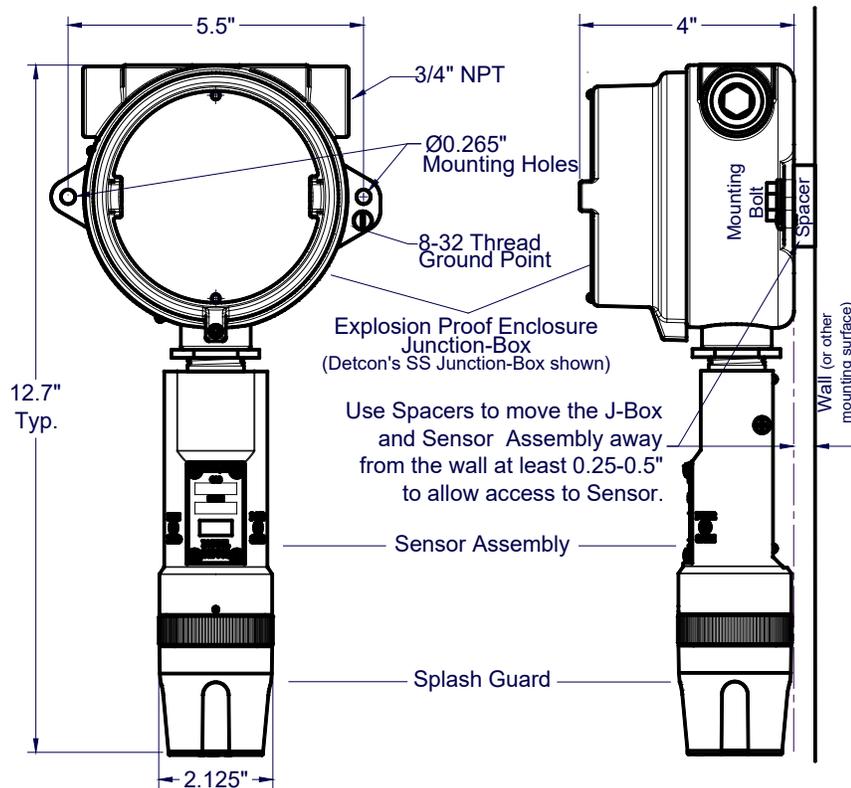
Outline and Mounting Dimensions (Stainless Steel Junction Box)
